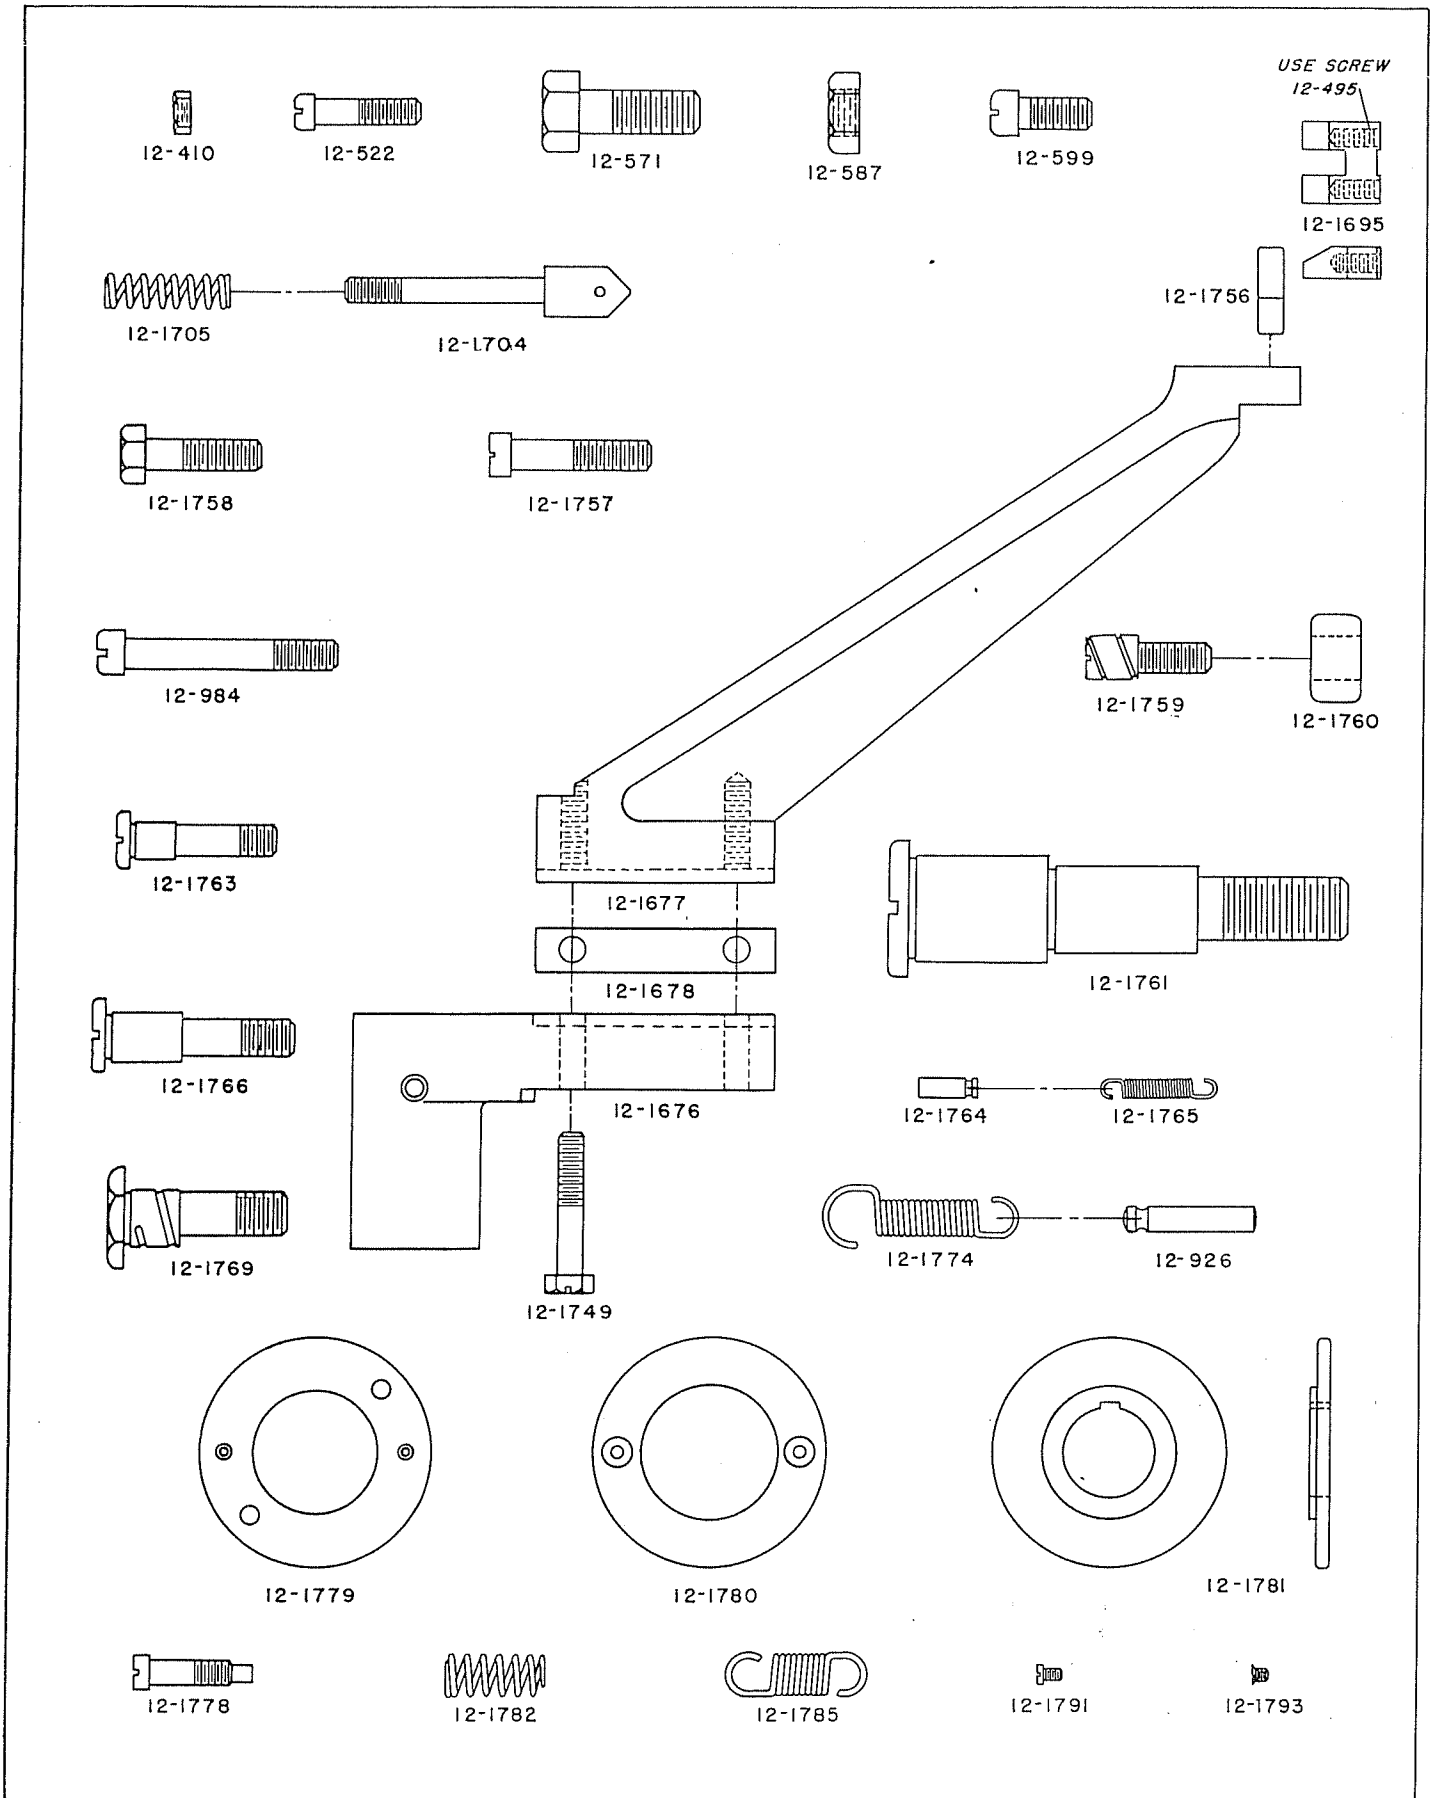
Tension Releasing, Take-Up, and Thread Pull-Off Mechanisms, Hold Back, and Tape Parts (approximately 1/2 size)
